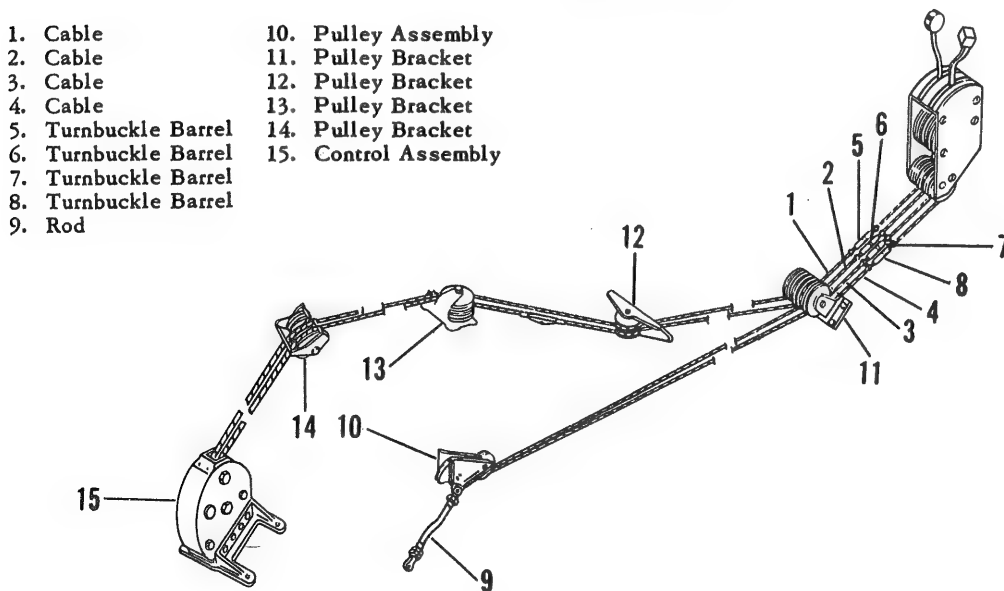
Carburetor Mixture and Carburetor Air Temperature Control System (Helicopters Serial No. 55-4462 and Subsequent)
